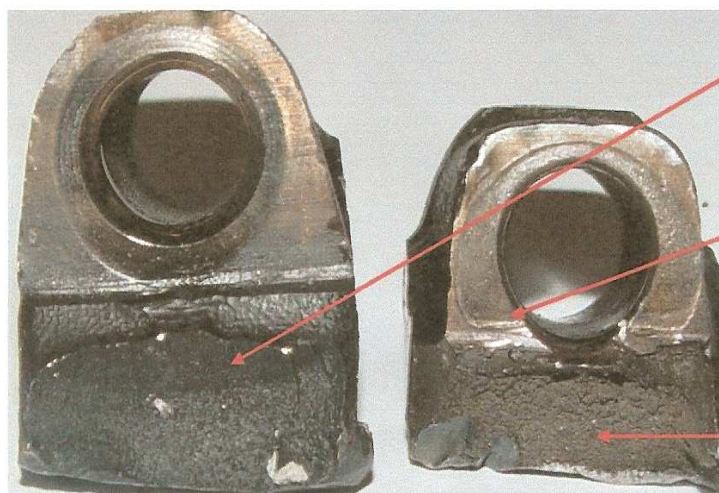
Fracture surfaces from cap fastener (digital)
